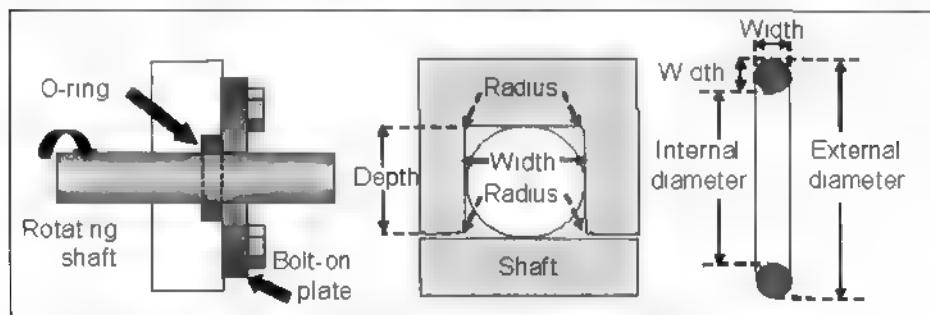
A gland fitted with an O-ring seal showing the design of the groove and the way an O-ring is dimensioned.
